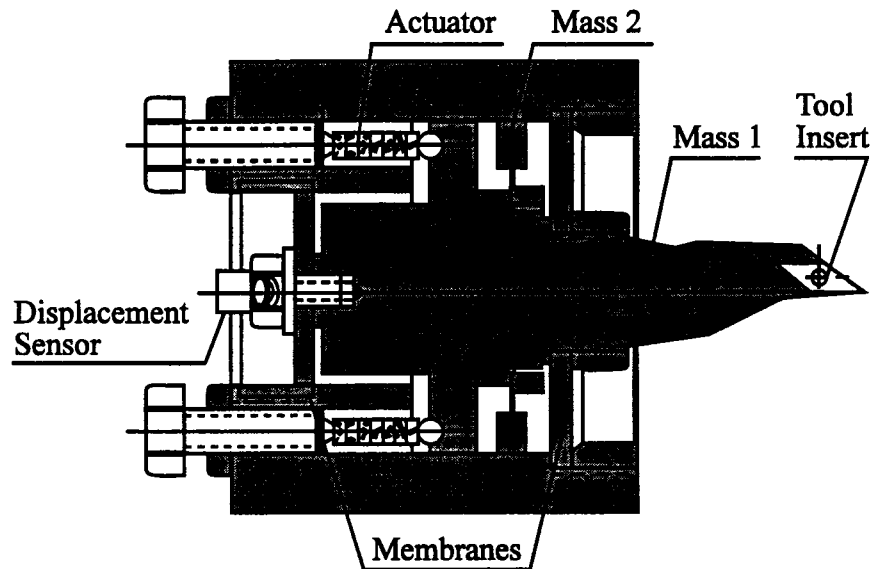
Assembly Drawing of Smart Tool Post Structure
